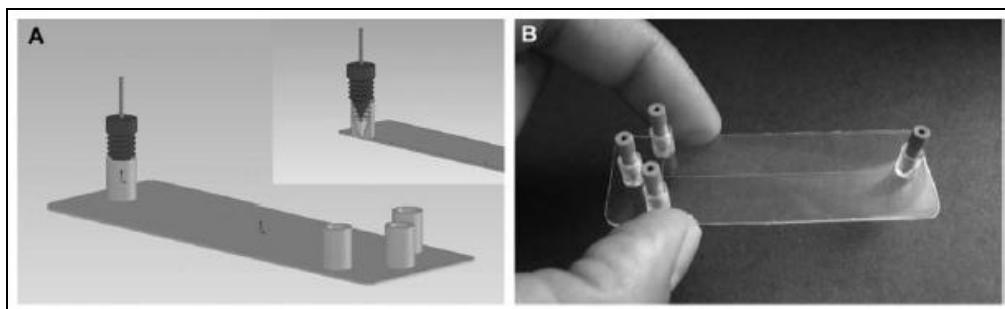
Concept of microfluidic chip featuring integrated ports (A) and a 4-port chip with commercial male fittings threaded integrated ports of an injection moulded chip (B) [141]
